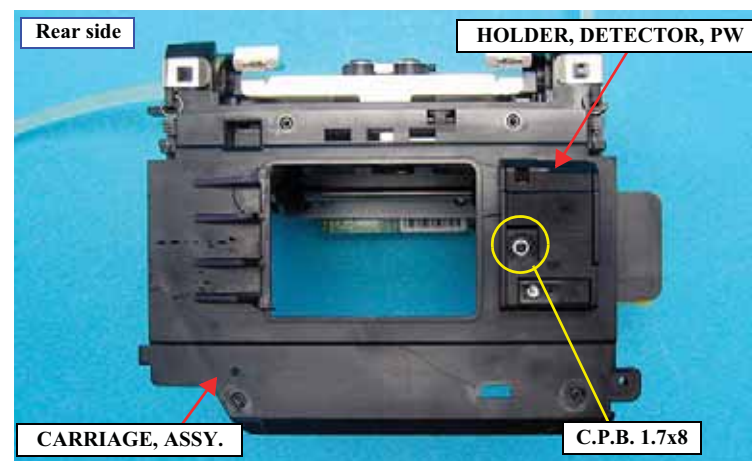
Removing the HOLDER, DETECTOR, PW
